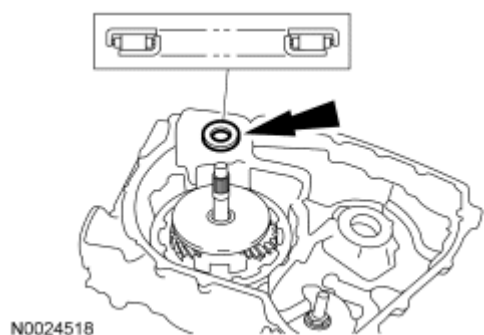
No. 6 Low/Intermediate Carrier Thrust Bearing
